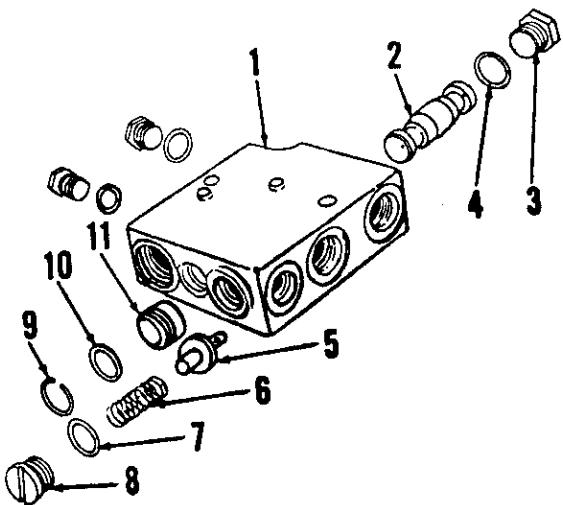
Exploded view of the proportional type flow divider valve used on Series 424, 444, 2424 and 2444 tractors. Note the power steering relief valve (5).
